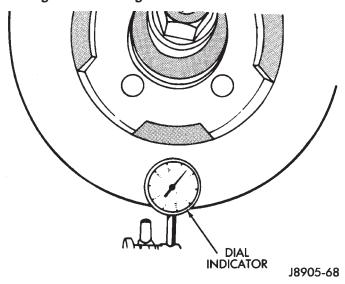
Checking Rotor Lateral Runout REAR DISC BRAKE ROTOR
